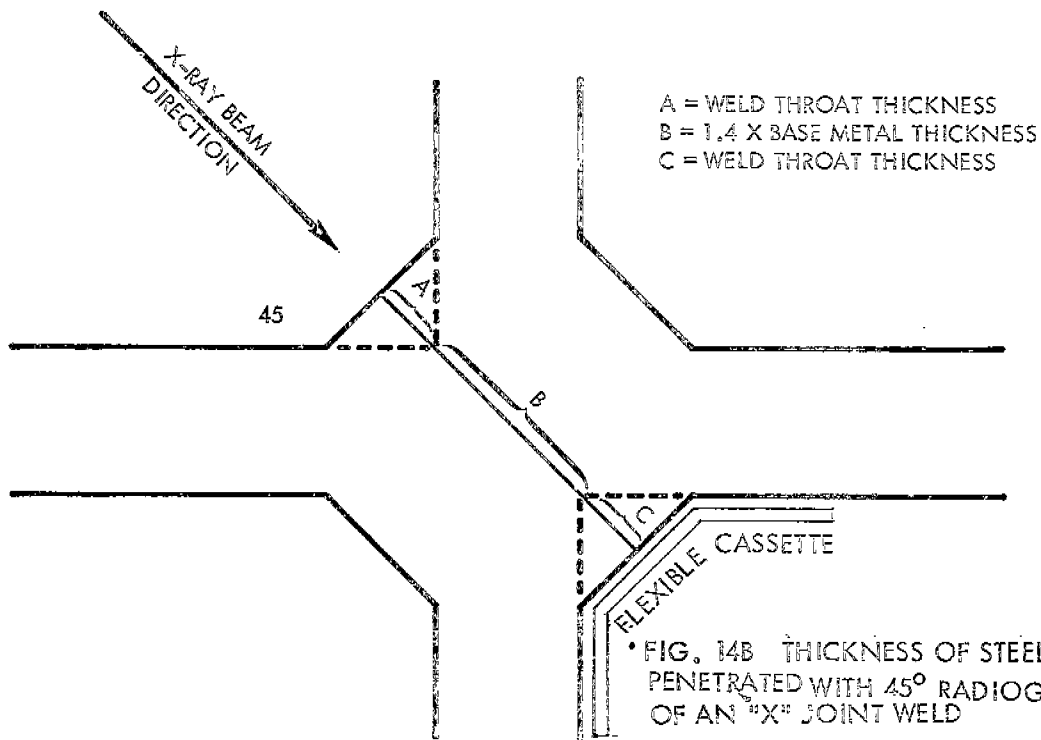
B THICKNESS OF STEEL TO BE PENETRATED WITH 45° RADIOGRAPHY OF AN "X" JOINT WELD
